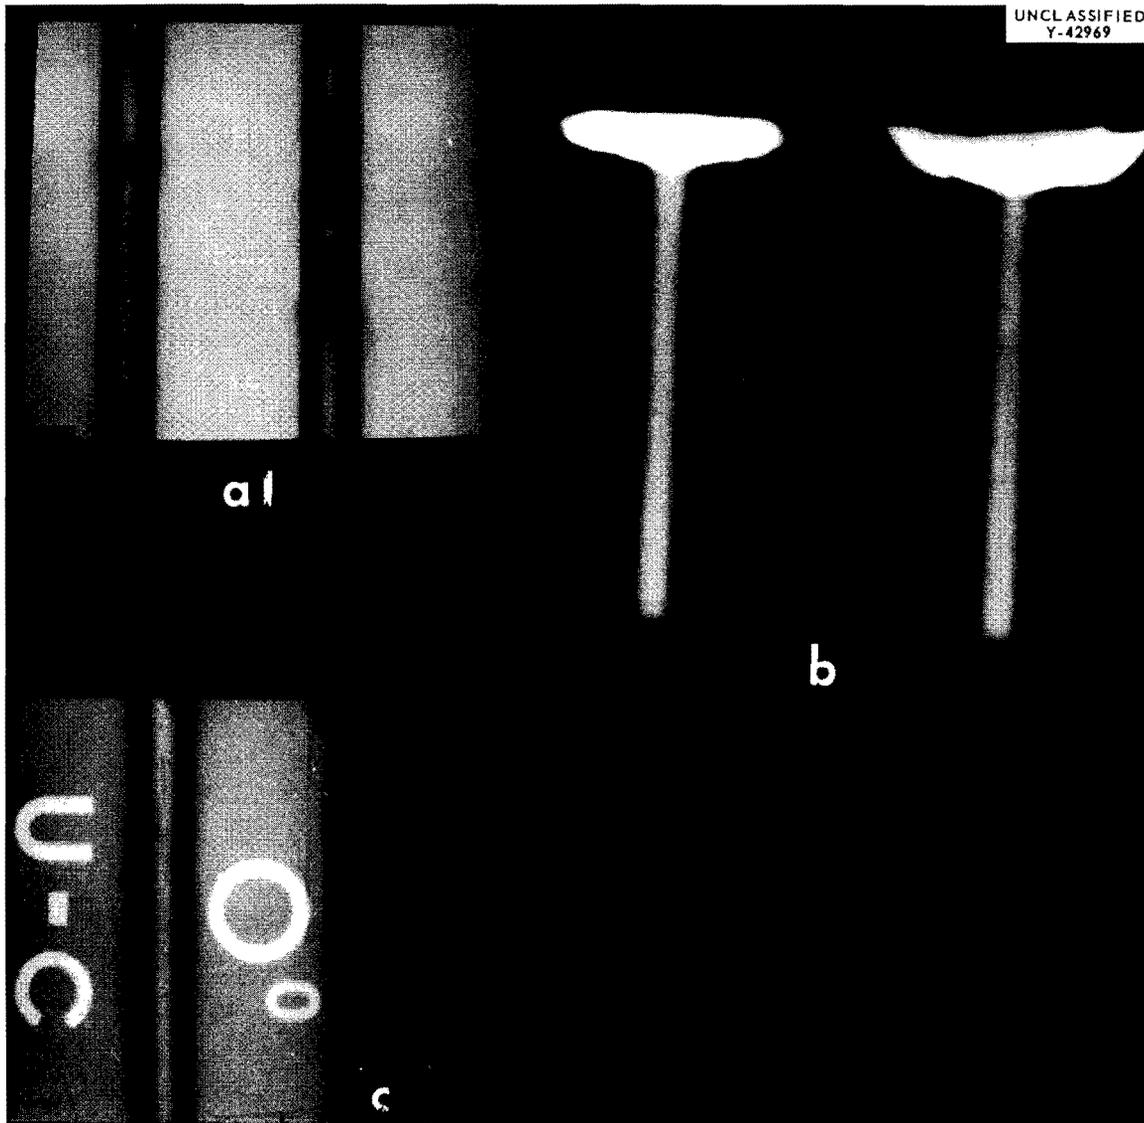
Radiographs Illustrating the Casting Integrity Resulting from (a) a Solid Copper Mold, (b) a Hollowed Copper Mold Utilizing "Split-Mold Inserts," and (c) a Hollowed Copper Mold Employing an Inner Sleeve Mold in Conjunction with the Split-Mold Inserts. Reduced 22%.
